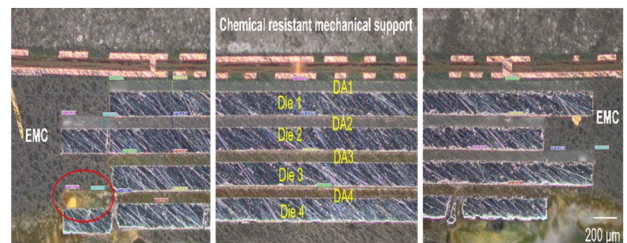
Dark field optical image of four-die stacked package encapsulated in CR mechanical support and mechanically grinded to reveal the root cause of die crack. Root cause of die crack is due to die attach swelling (encircled in red). Other cracks could have been induced by too much force applied during grinding
